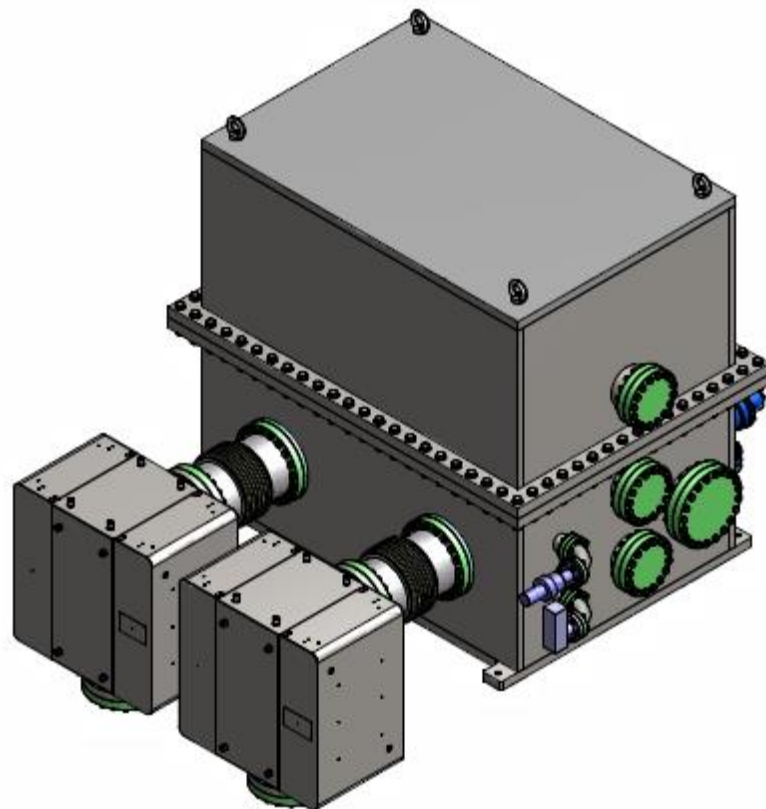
Model of the ISR Dual Phase Plate Assembly vacuum chamber, which is being designed and built by Huber subcontractor PINK GmbH Vakuumtechnik.
